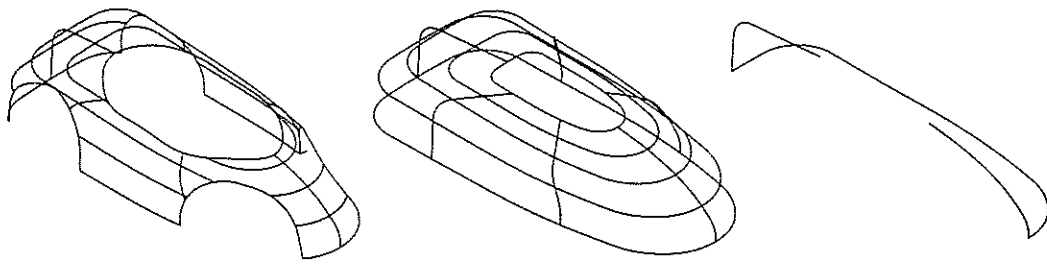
Trimmed surface, base surface, and wires of the main body
